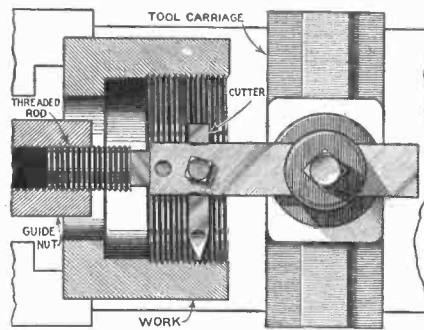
In cutting threads on a gearless lathe, if this method is employed, the feeding of the tool will be accurate.
